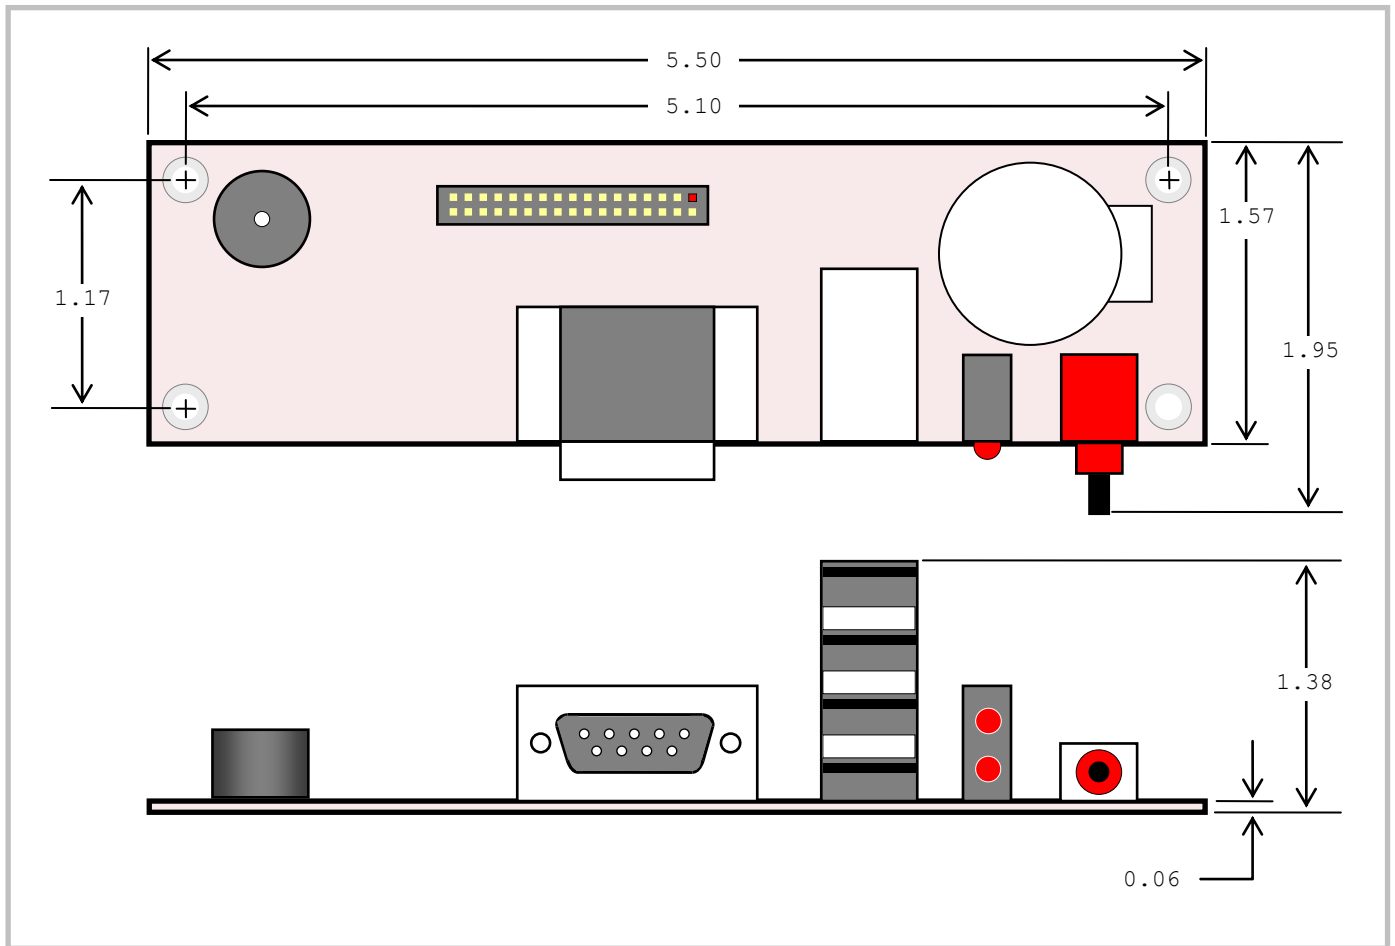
VL-CBR-3406 Dimensions and Mounting Holes (Top and Side Views)
